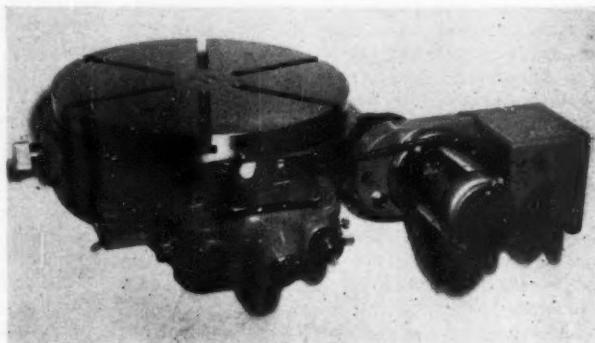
O.M.T. 16-in. Diameter Rotary Indexing Table for Rapid Indexing and Light-duty Milling Operations
